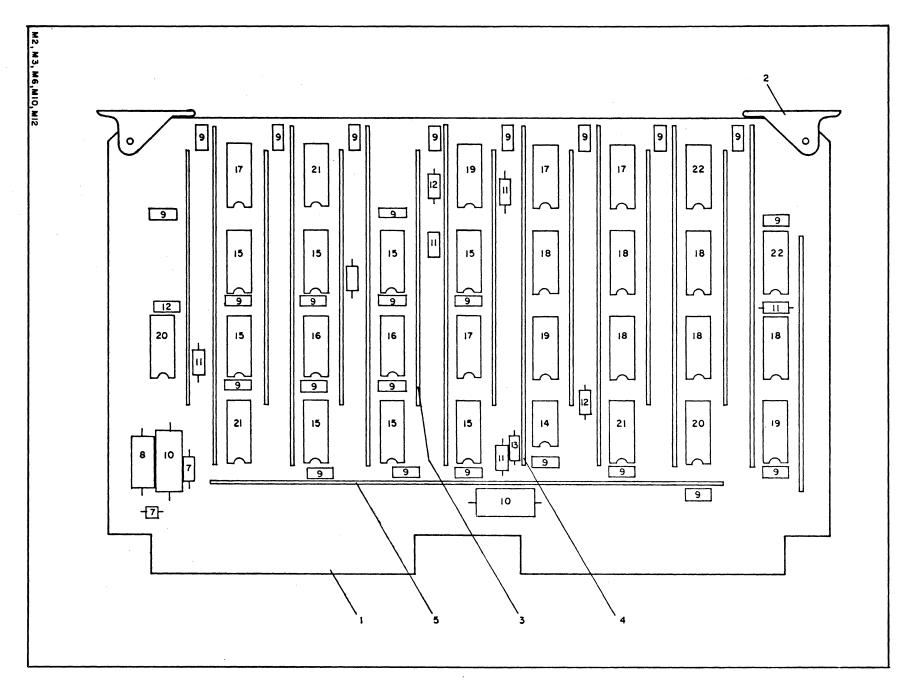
P.C. ASSEMBLY - Sync Card
